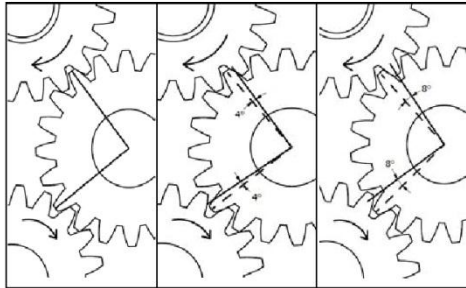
Gear train with one idler gear in 0°, 4° and 8° angular positions where single pair tooth contact takes place between meshing gears.
